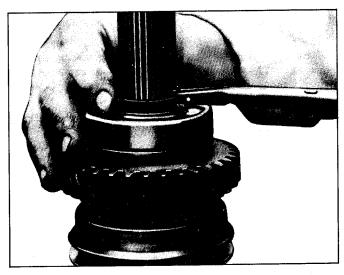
B-11K--Removing Rear Bearing Snap Ring
